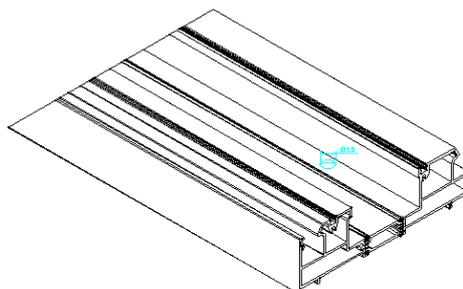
DETAIL A: WEEP HOLE MACHINING ΚΑΤΕΡΓΑΣΙΑ ΑΠΟΡΡΟΩΝ ΟΔΗΓΩΝ
